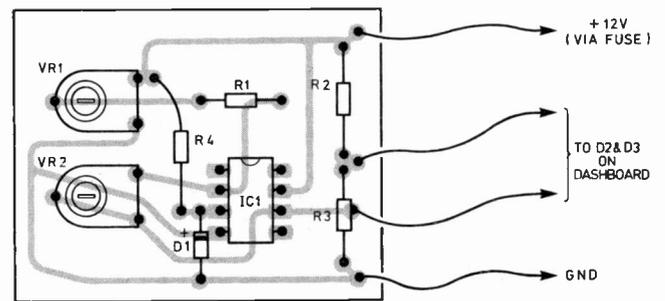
Component layout for Battery Condition Indicator. A fuse (FS1) should be inserted into the +ve supply wire using a flying lead type fuse holder
